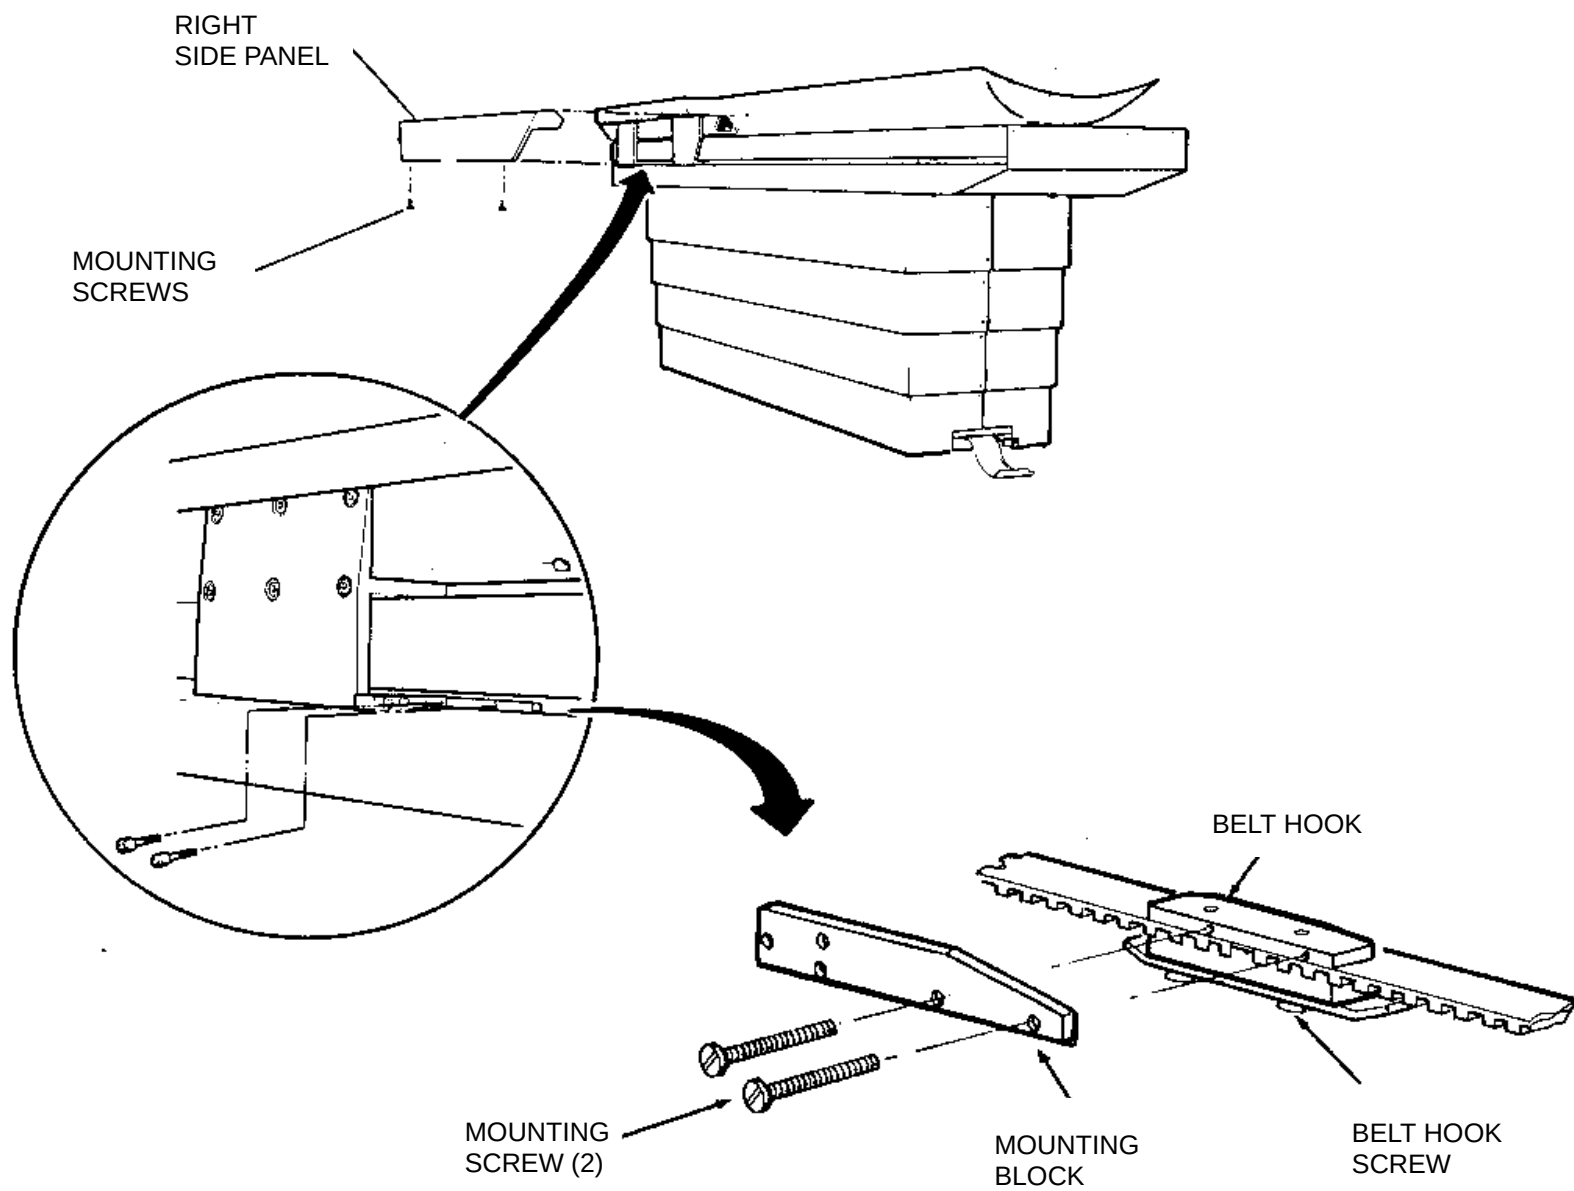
HORIZONTAL DRIVE BELT BLOCK
